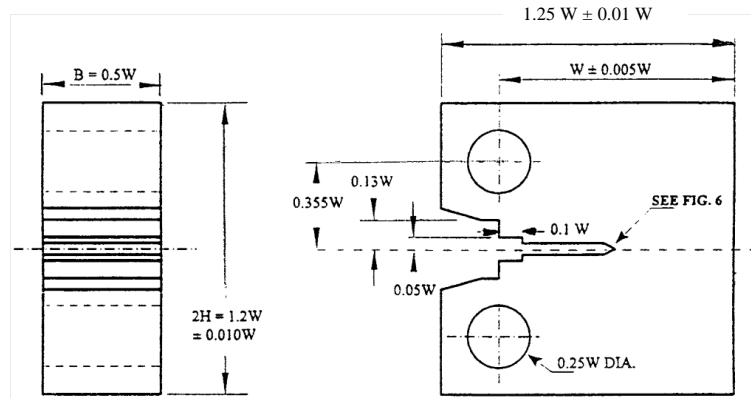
Relative dimensions of CT specimen for J_{Ic} testing according to ASTM E1820 [41]
